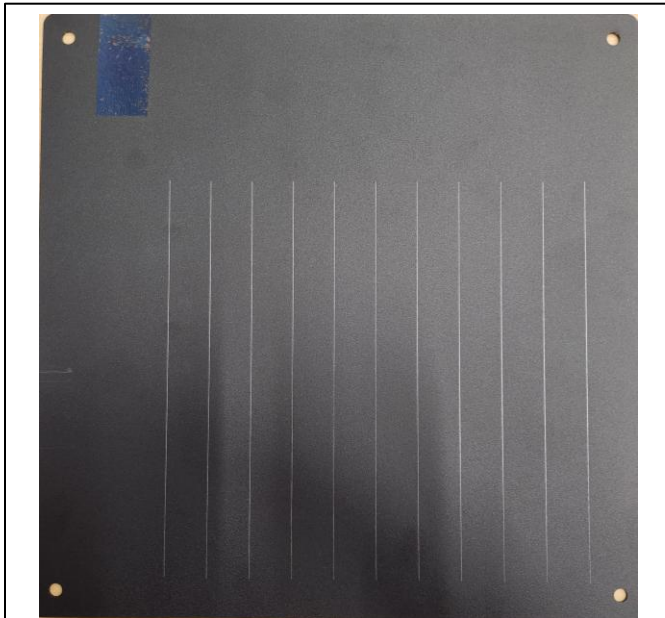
Sample of a plate with regularly-spaced incisions made using the coating thickness measurement tool automated with a CNC machine.
